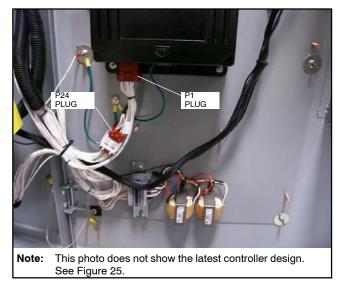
Conversion Kit Harness Connection to Controller Assembly (PTIB not shown)
